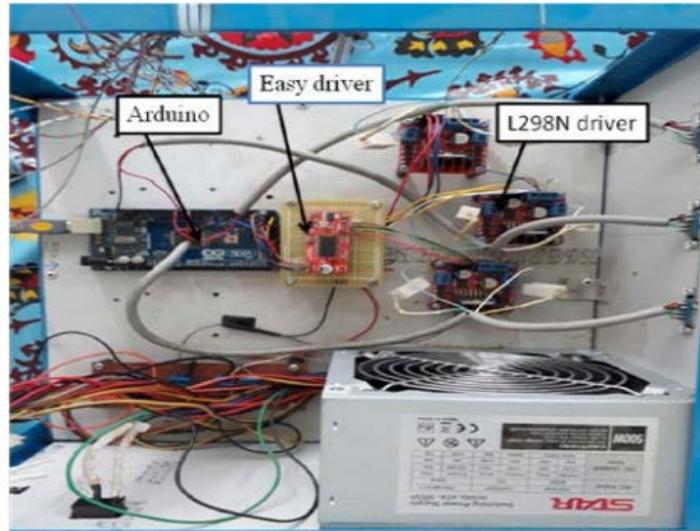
Circuit Connection of 3 –Axis Airfoil Maker CNC Machine
